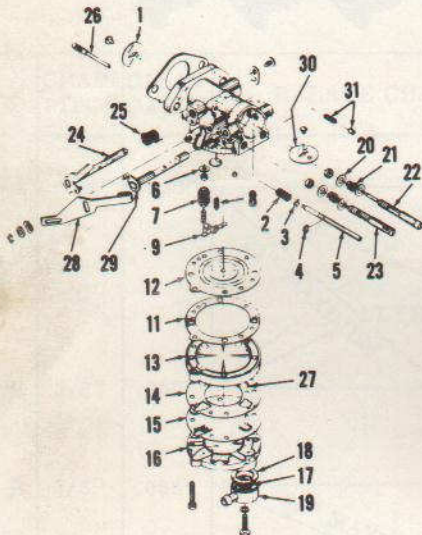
Exploded view of the Brown diaphragm carburetor used on early models. Springs (27) are located above both check valves. Choke parts (28-31) are sometimes removed when fuel primer pump (Fig. PR1-4) is installed. Refer to Fig. PR1-2 for legend except the following.
